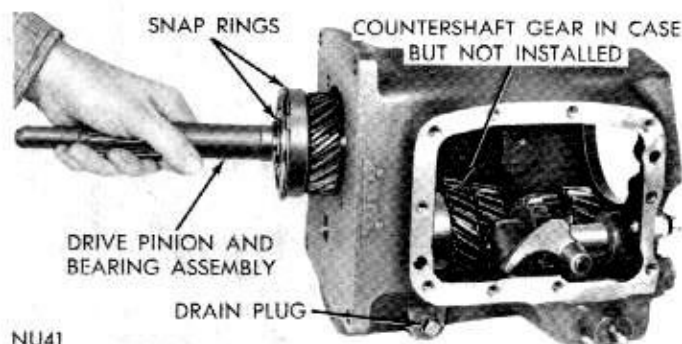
Removing or Installing Drive Pinion Assy. (Heavy Duty)
